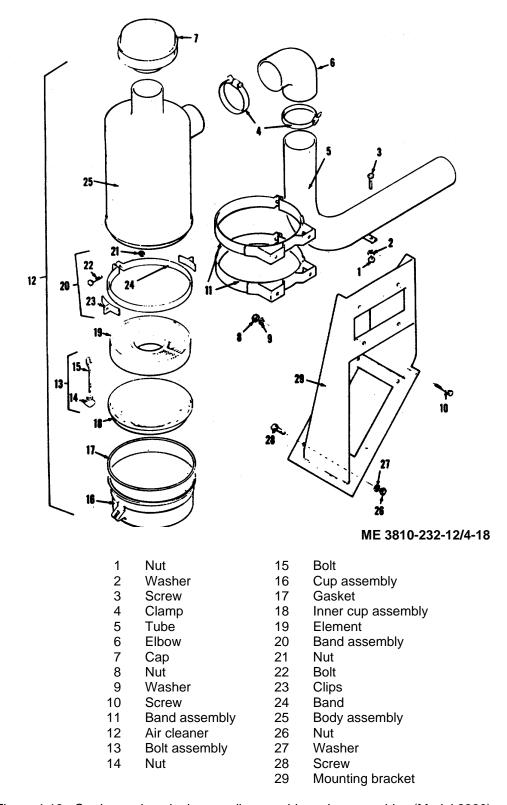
Carrier engine air cleaner, disassembly and reassembly. (Model 2380)
